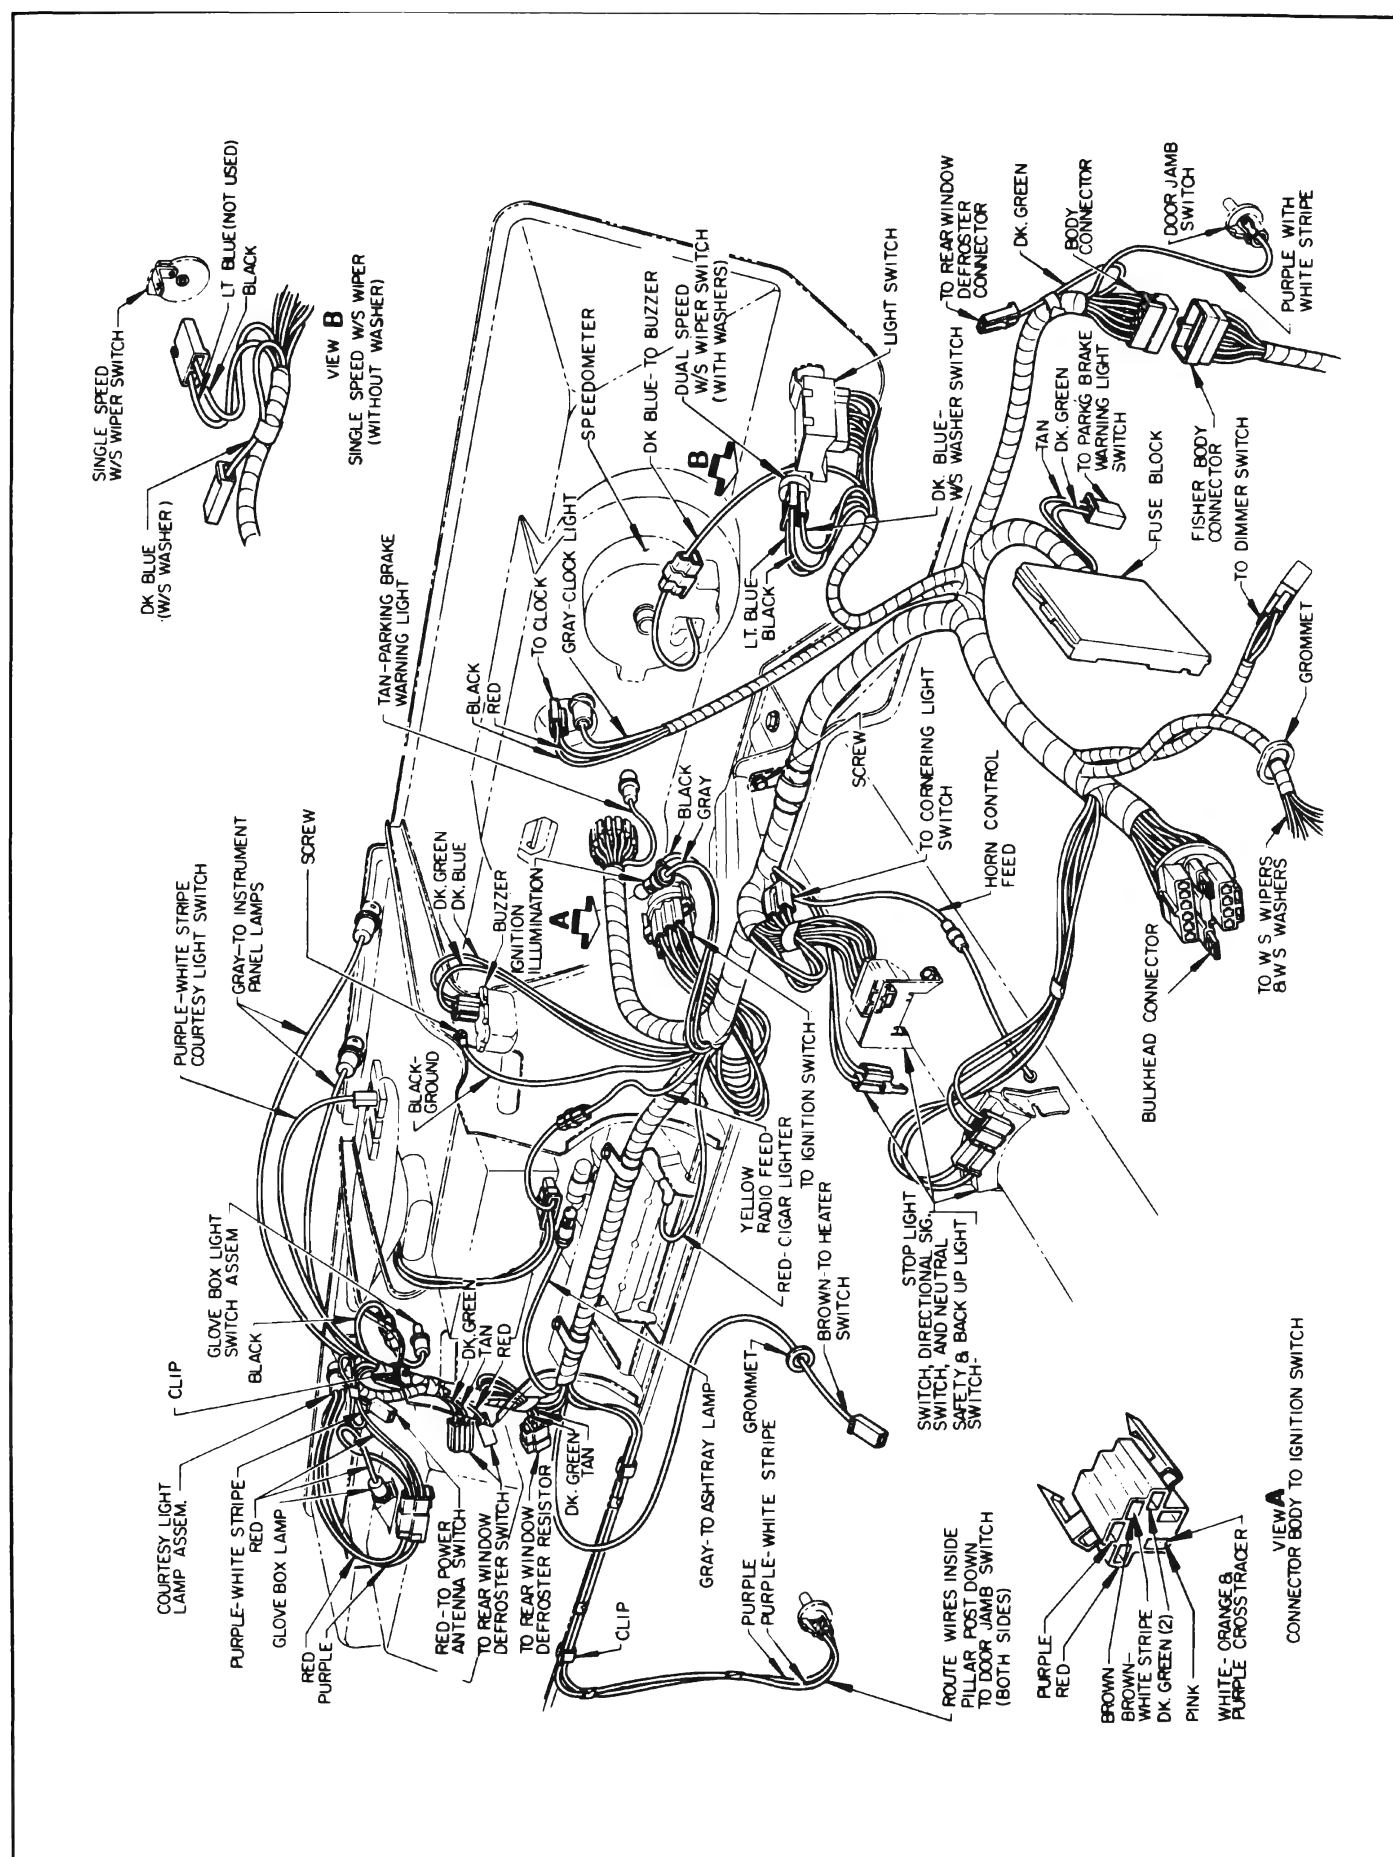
Standard Instrument Panel Wiring Harness—View from Forward Side
